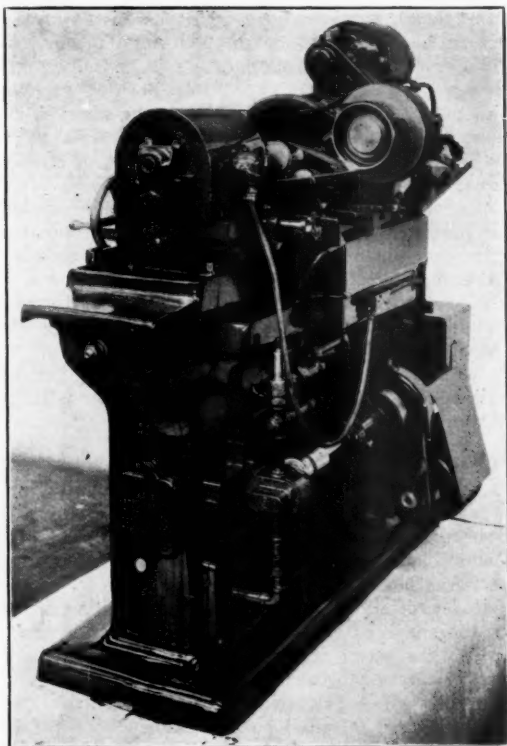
The Heald internal grinder with hydraulic table drive.
